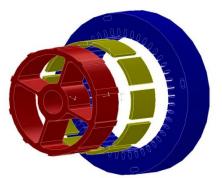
Rotor iron, permanent magnets and stator stack of an internal rotor machine
